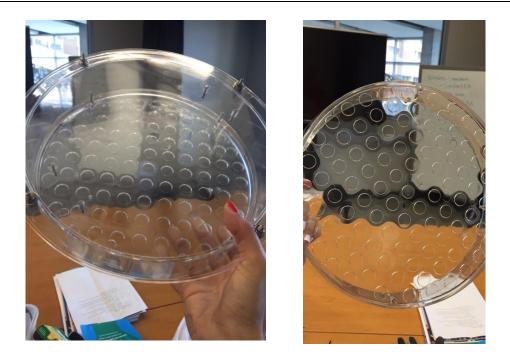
Six additional samples the finalized design of the new housing of the fully working prototype signals of Type 1, modelled in the factory of Eco Molding. Each sample includes three plastic parts: the wholepiece of new housing that accommodate 96 small Fresnel lenses for light collimation of individual LEDs, a cover for the new light engine, and another back cover for the housing which will be used to mount the new custom-made LED drivers.
